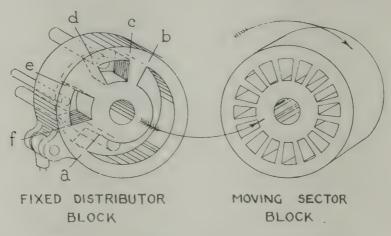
ROTARY VACUUM FILTER VALVES.
